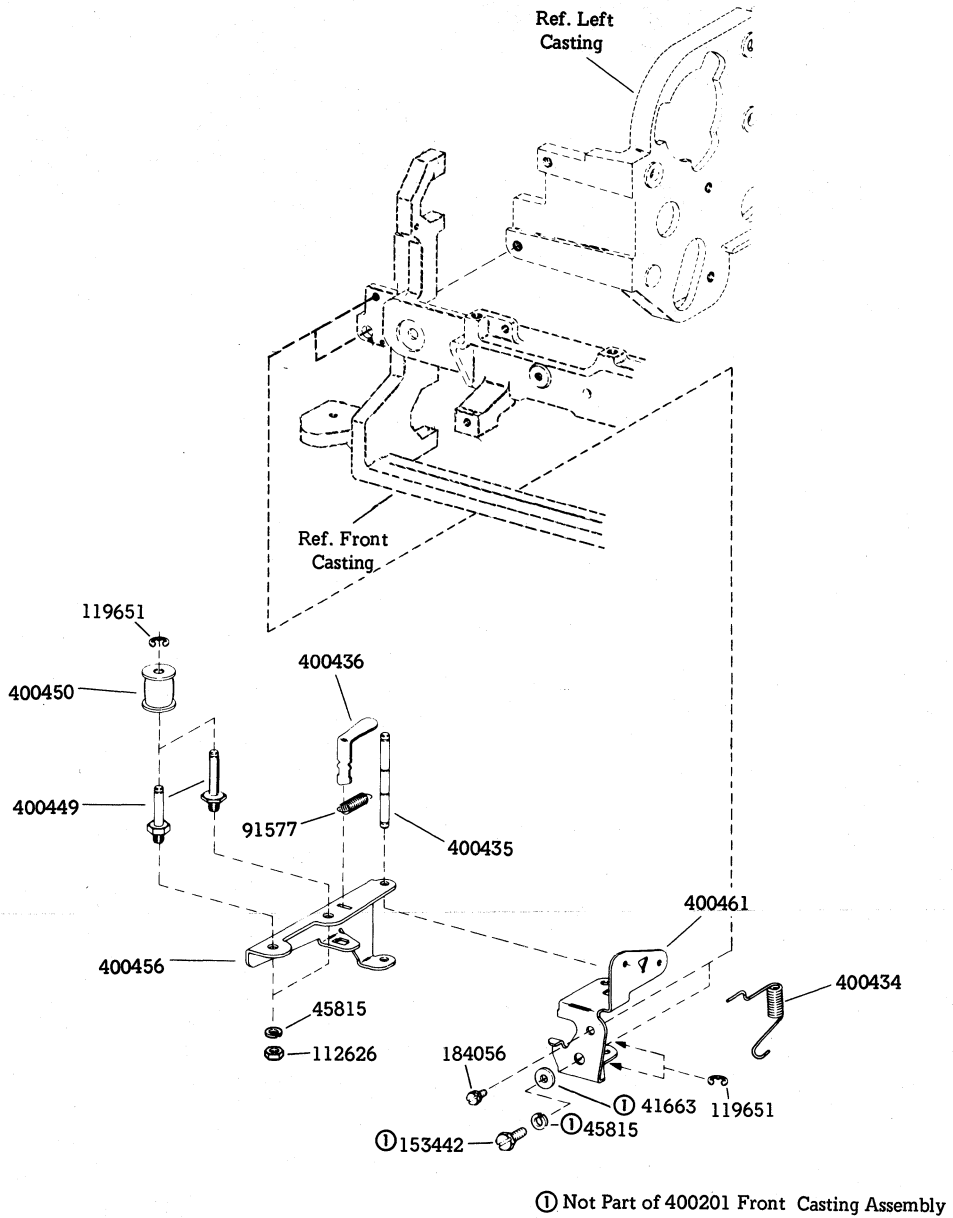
Front Casting Assembly (Friction Feed 40P101 - Early Design) (Cont.)
